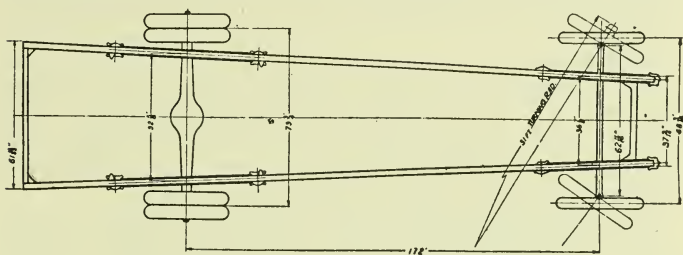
CHASSIS DIMENSIONS OF THE 29-PASSENGER SINGLE-DECK BUS
